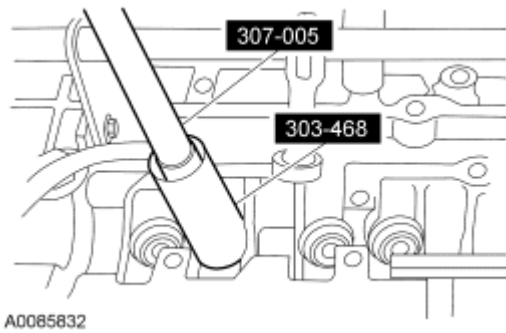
Removing Valve Seal Using Special Tools (307-005, 303-468)
